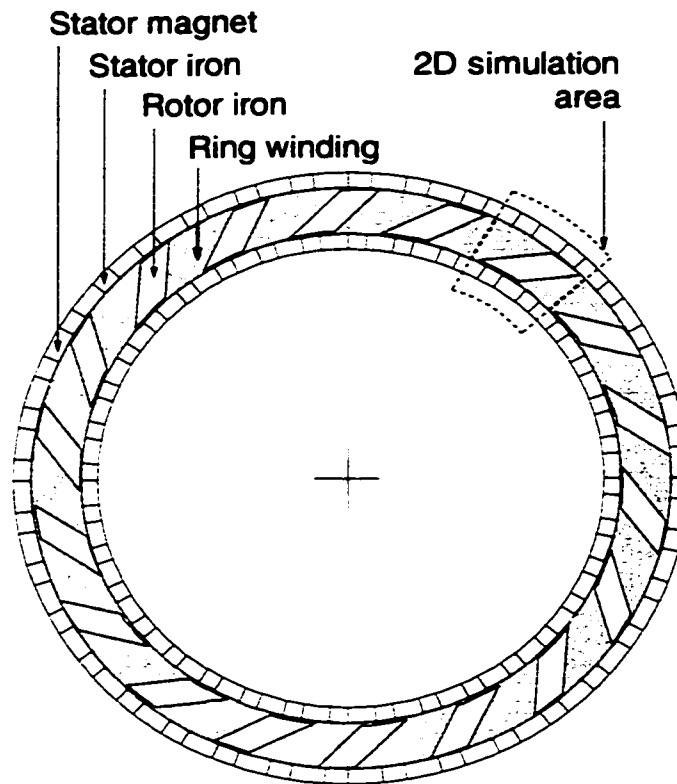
Cross section of the passive rotor machine with *slanted rotor design* showing the two-dimensional simulation area
